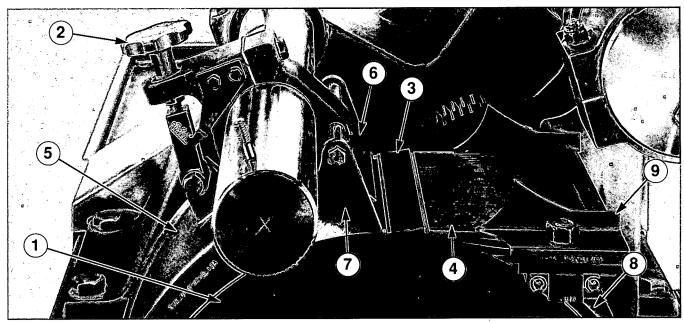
The slicing unit. (1) Impeller, (2) Slice Adjustment Knob, (3) Slicing Knife, (4) Slicing Knife Holder, (5) Case Gate, (6) Gate Extension Strip, (7) Chip Guard, (8) Slice Case, (9) Slice Guide.
